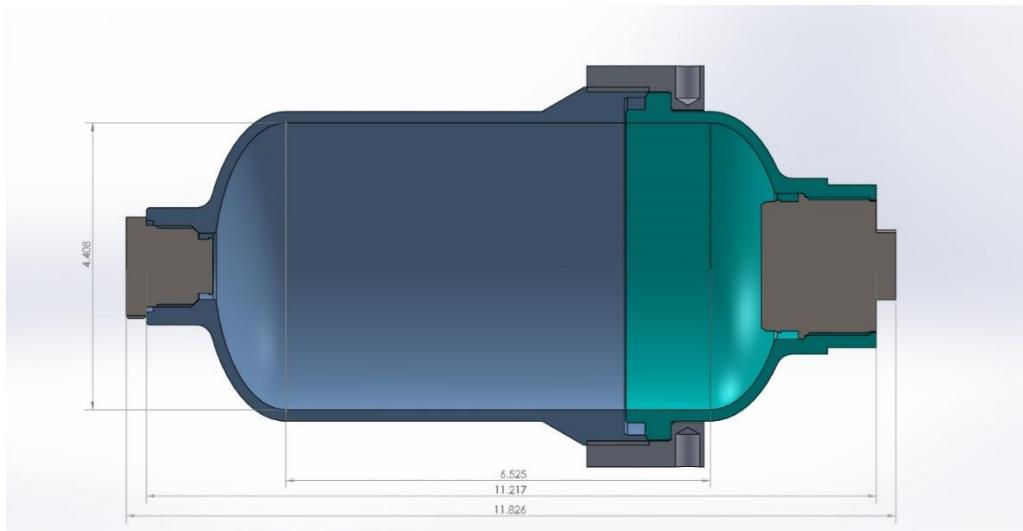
Cross section of the re-designed 3-piece Type 1 with fittings and overall dimensions
